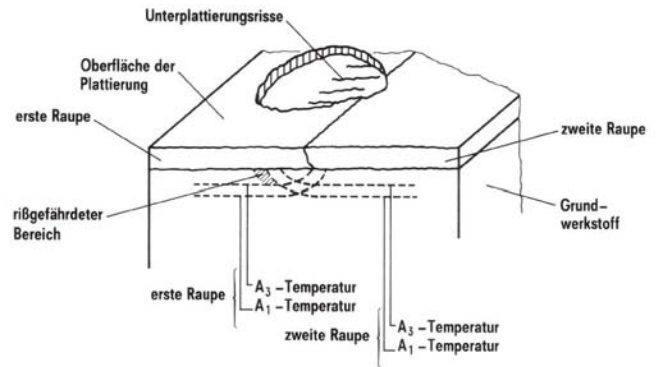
Principle of the appearance of underclad cracks beyond strip cladding (acc. [27])
